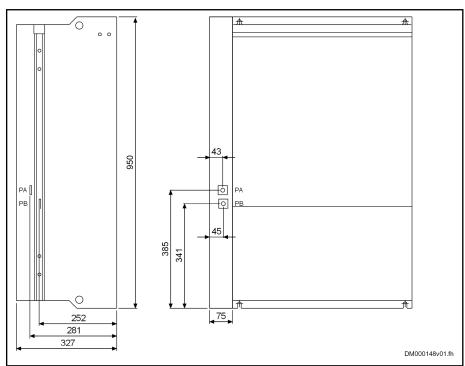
Dimensions Braking Unit HLT01.1A -200K
